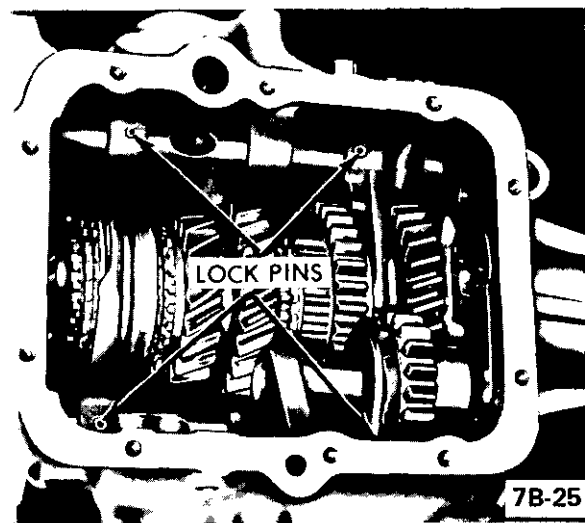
B-26 Position of Lock Pins for Shifter Forks and Selector Dogs
